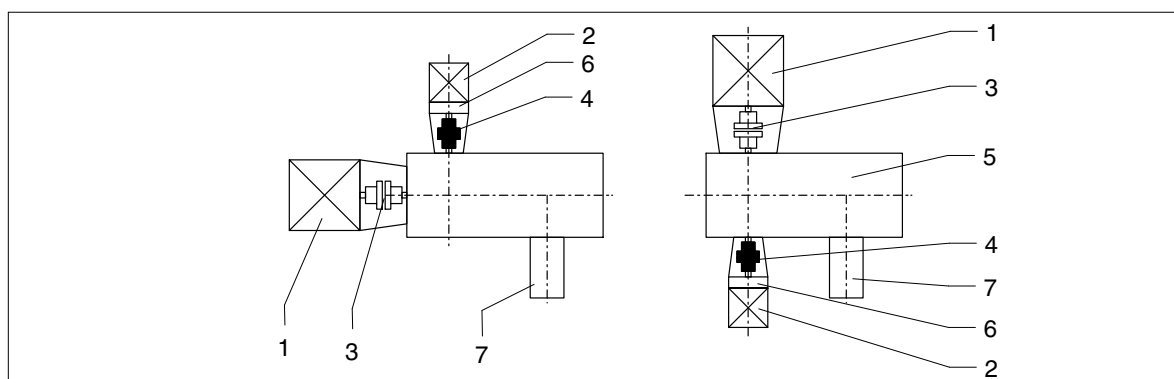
Basic configuration of the gear unit with main and auxiliary drives
